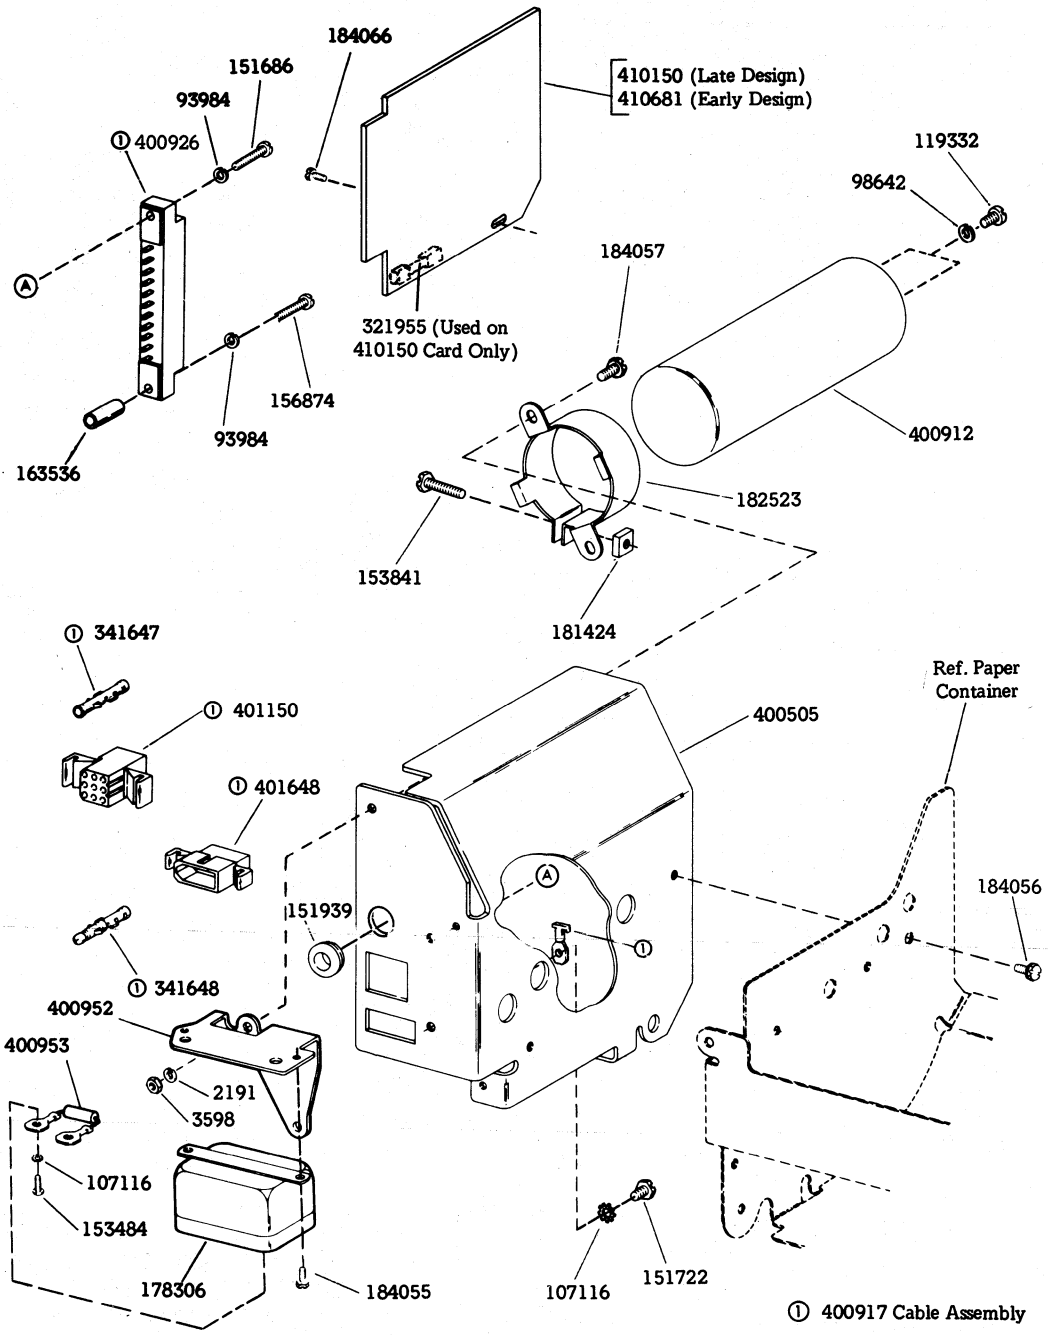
Power Supply Assembly (Friction Feed)
